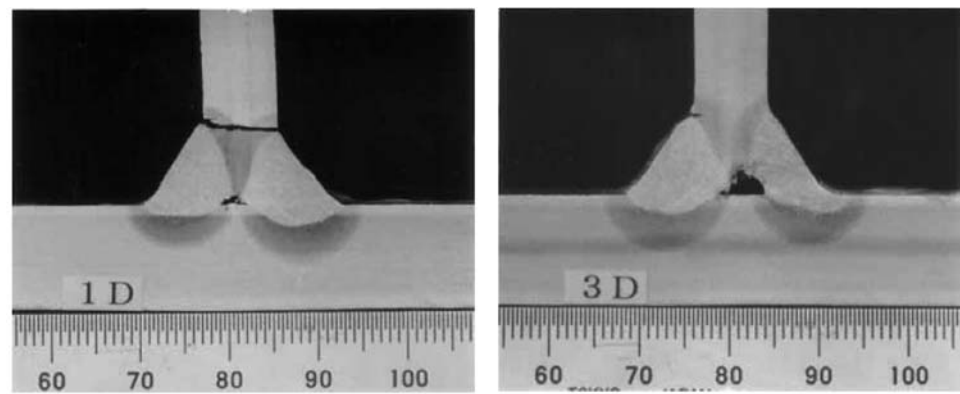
Macroscopic Specimen from 90-Degree Rounded Detail with Fatigue Cracks.
